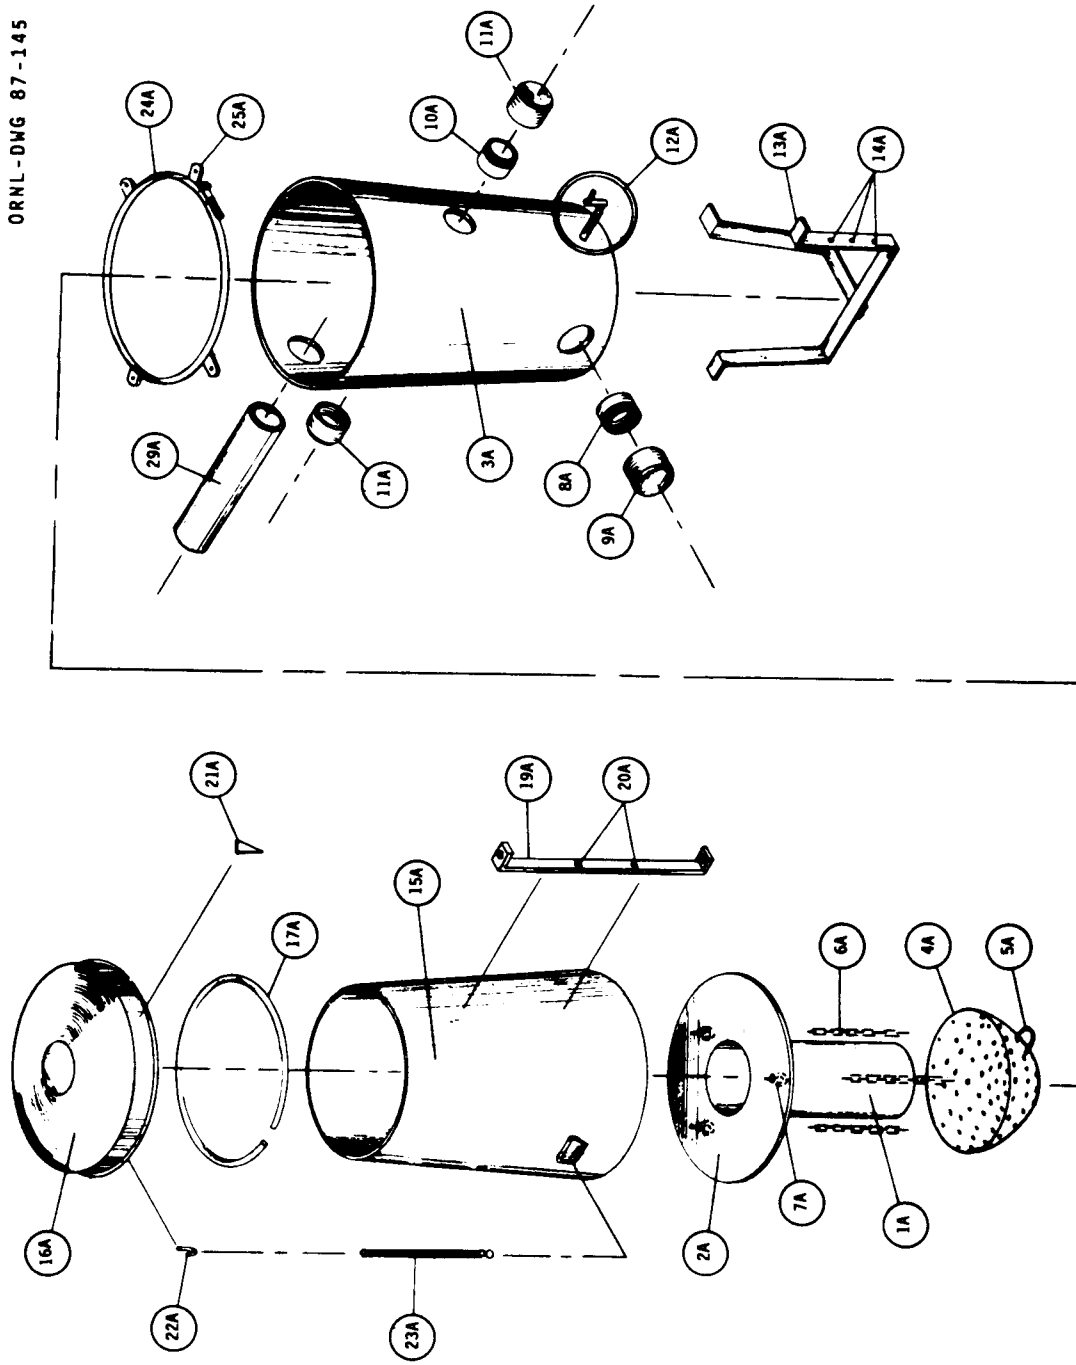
Exploded, schematic diagram of the wood gas generator unit and the fuel hopper.
